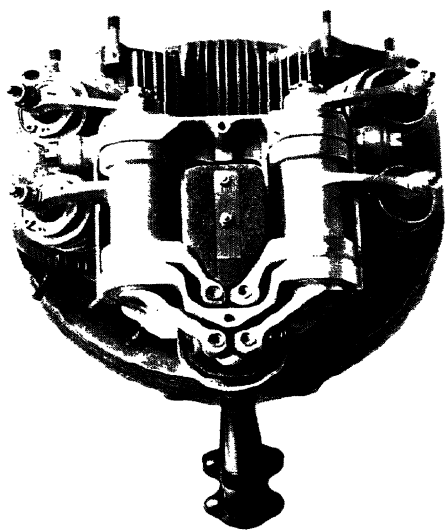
Cylinder head of the Bristol "Mercury" engine showing valve gear.
